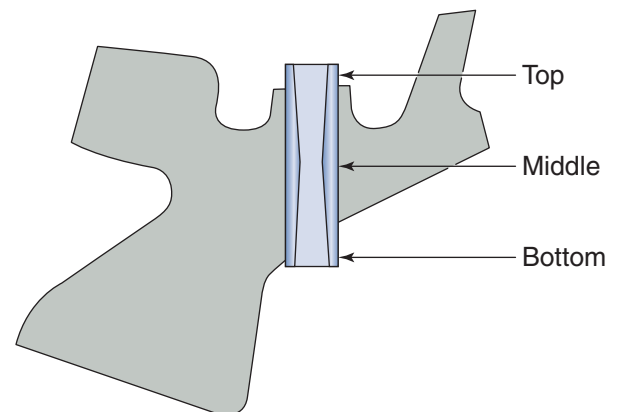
Most of the wear on a valve guide occurs at the top and the bottom of the guide.
